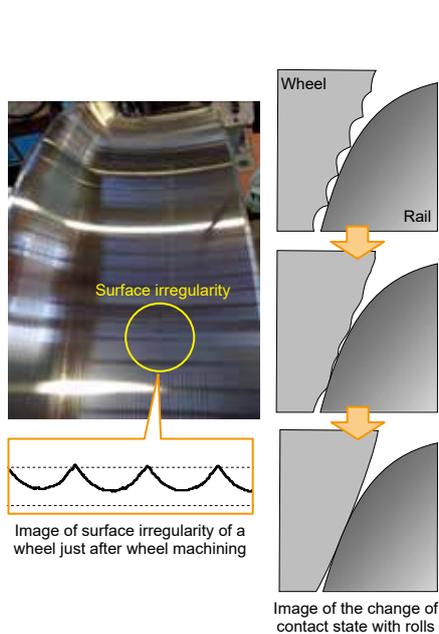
Image of surface irregularity and contact state just after wheel machining
